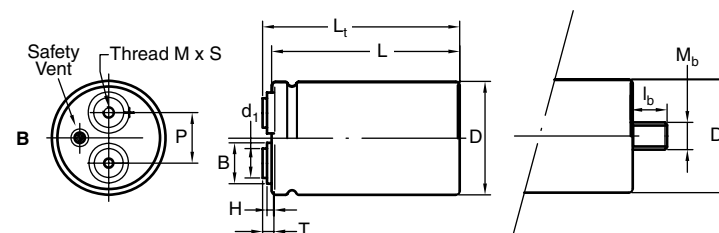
B: High current M6 disc: screw terminal (ST) and screw terminal bolt nut (STB)
